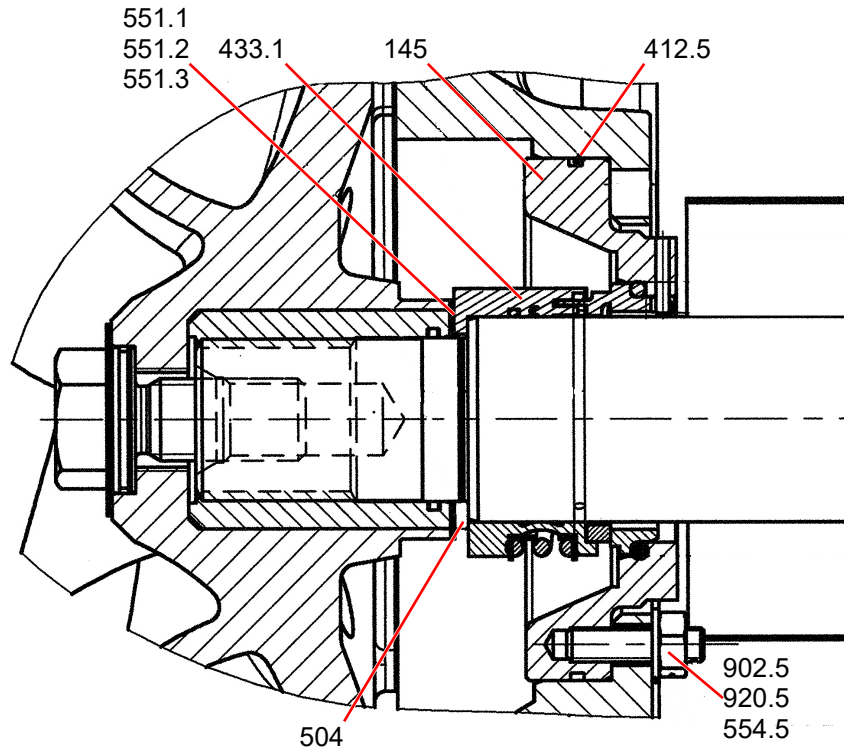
Mechanical seal – single-action (BS42 – BS100)
